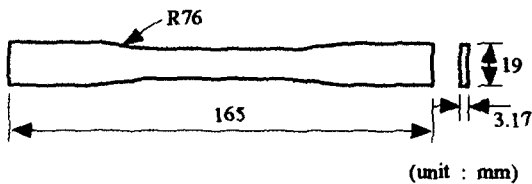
Dimension of tensile-bar-shape specimen (ASTM D638 type 1).
